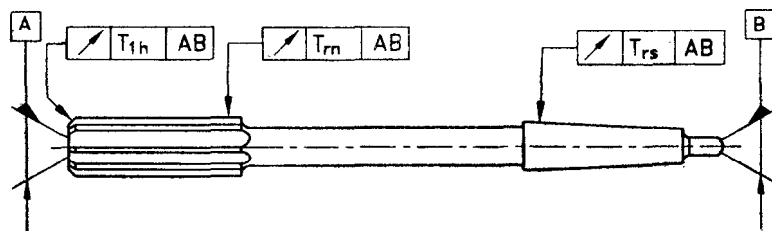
RUN OUT TOLERANCES FOR CARBIDE TIPPED REAMERS WITH MORSE TAPER SHANK
